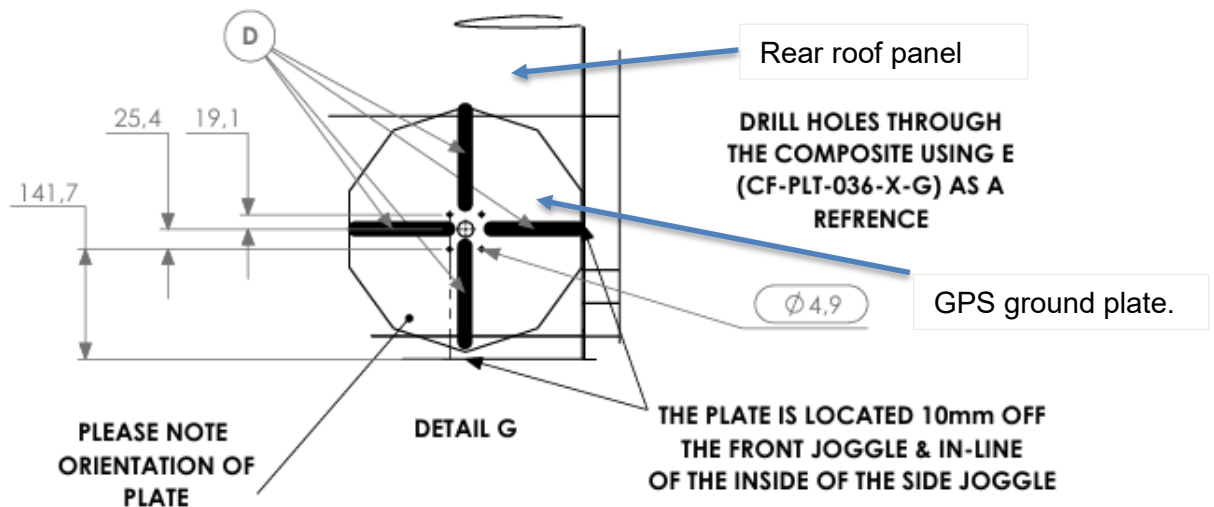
Showing how to bond the GPS ground plates on the rear roof panel.
